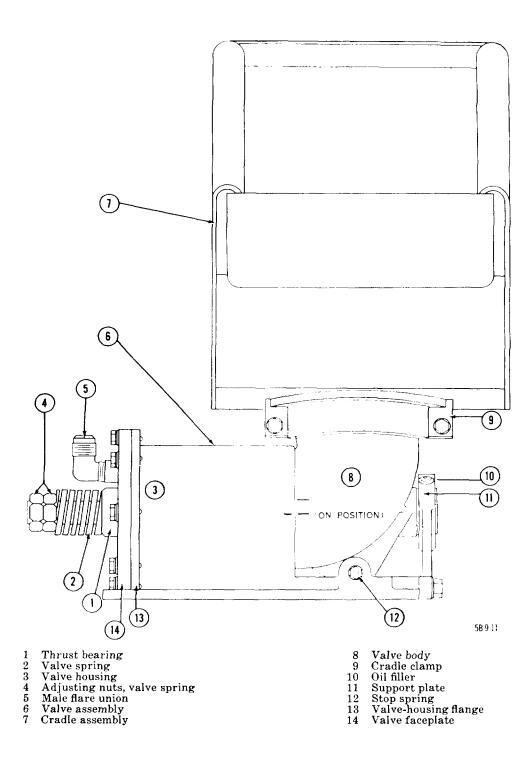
Cradle and cradle-valve assemblies, showing indications of proper limits of movement of cradle, operator's view (Model 4310CA).
